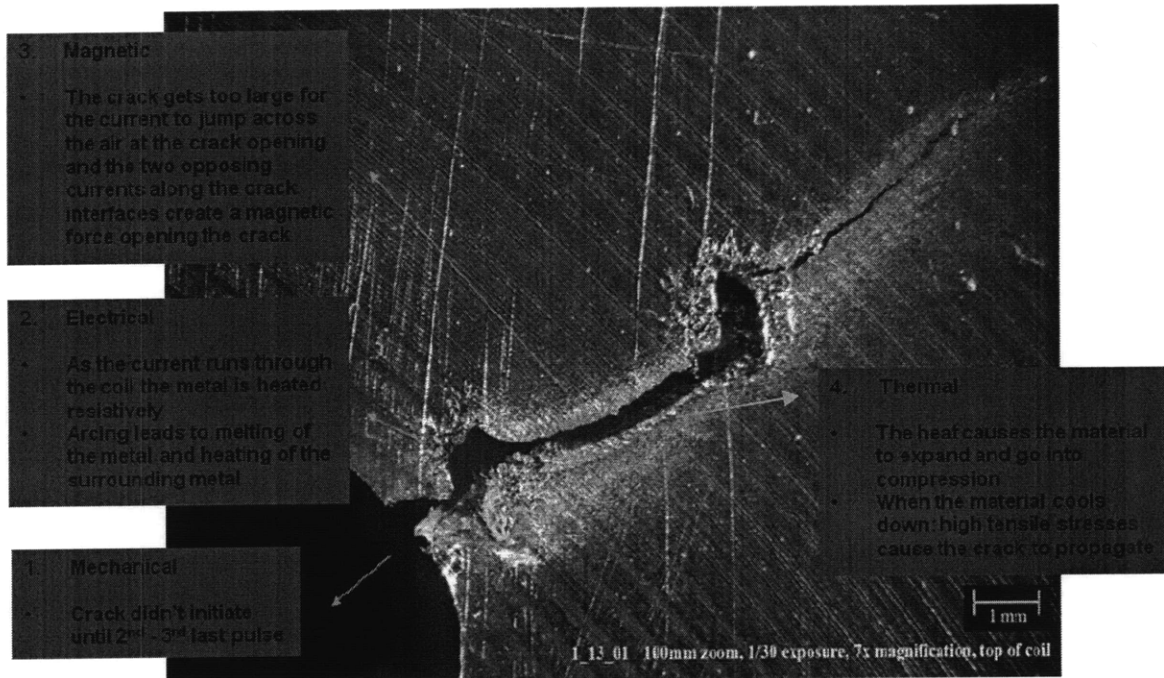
Digital Photograph of crack 1_13 (Specimen I, crack 13).
